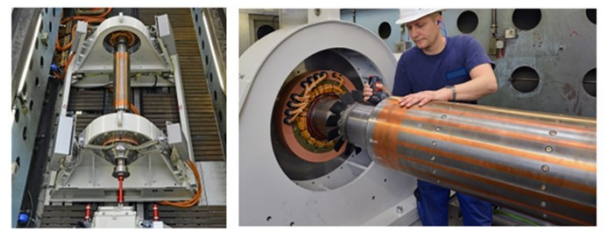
high speed motor rotor, massive shaft design (in balancing bunker, here with Active Magnetic Bearings)
